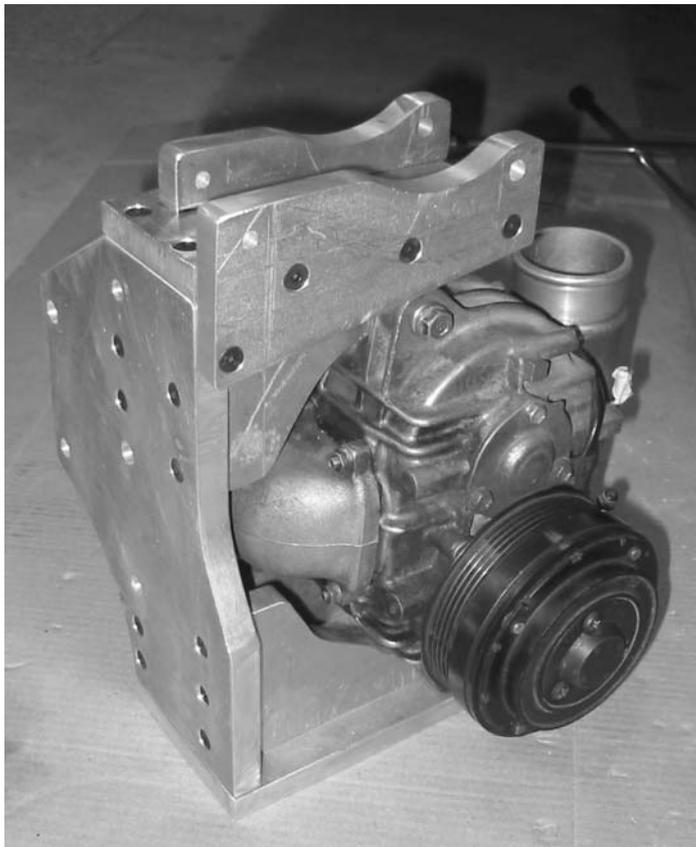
Completed Aluminium bracket bolted to supercharger, ready for installation on engine
